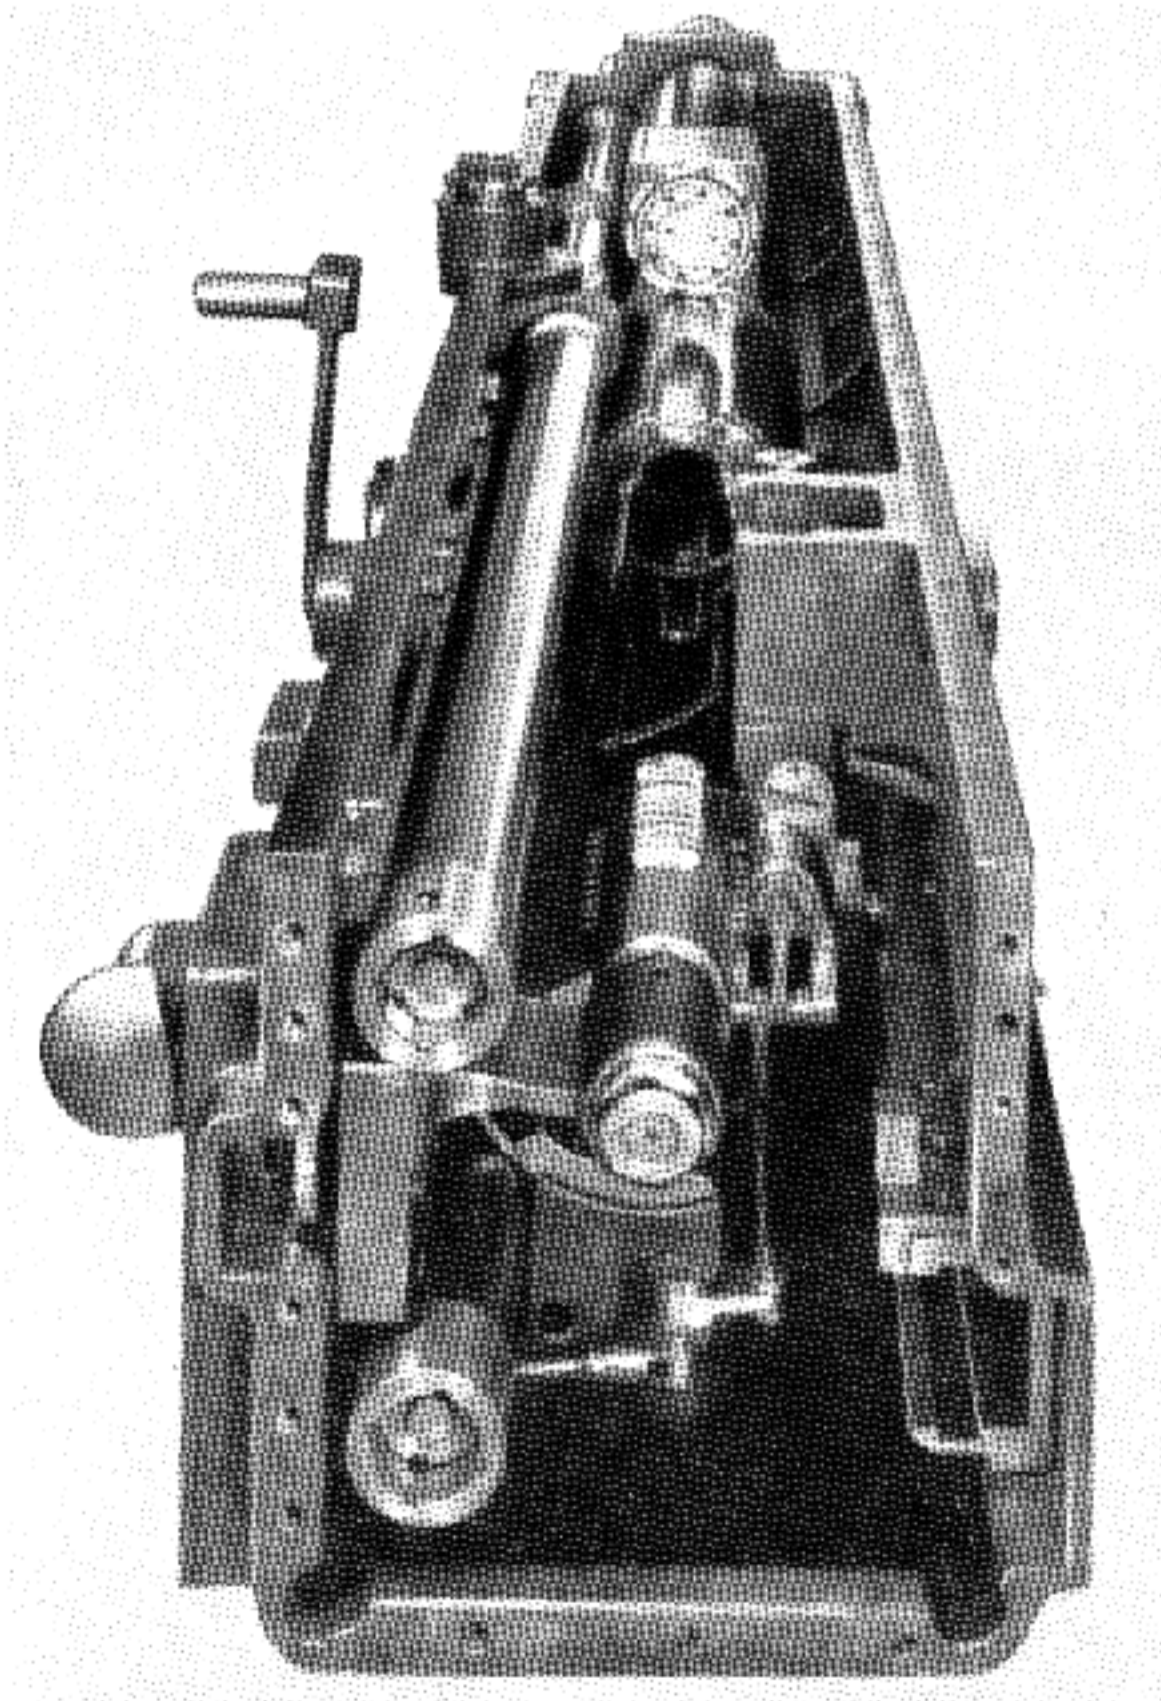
Experimental Italian 47-mm Aircraft Machine Gun. Rear view of operating mechanism.
